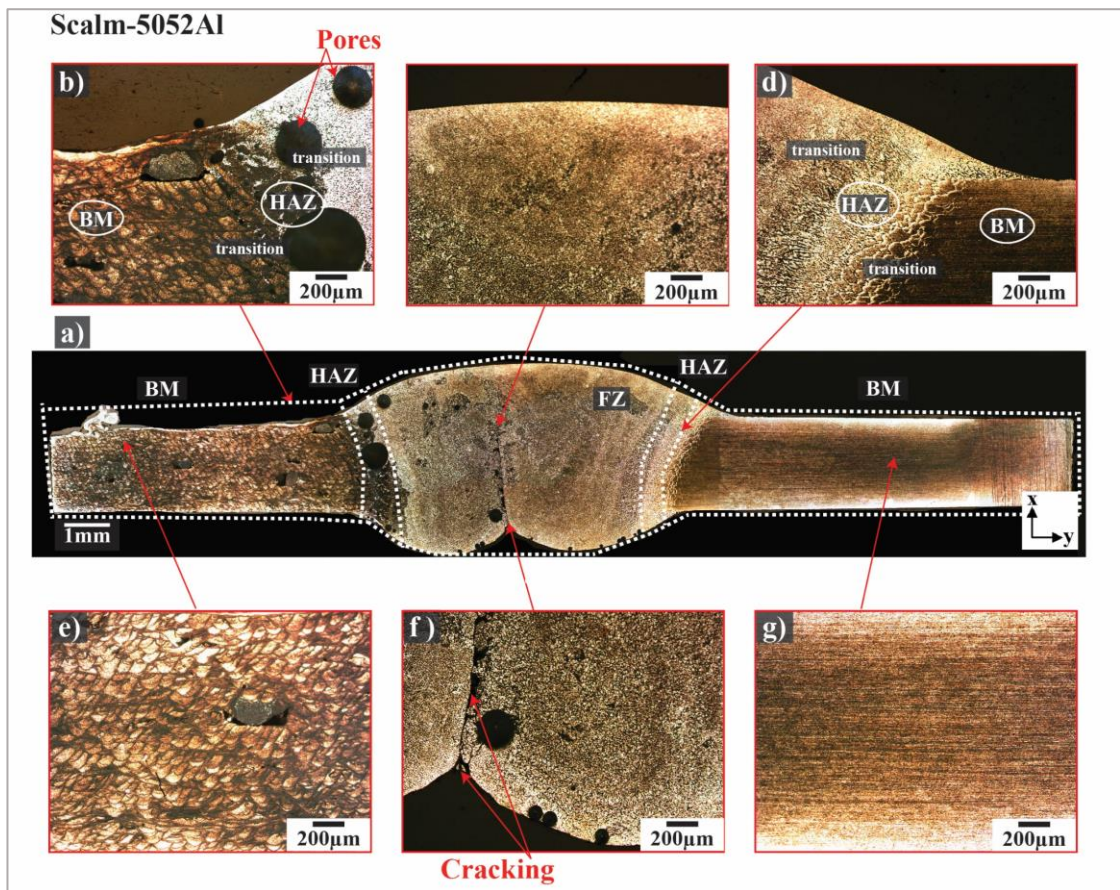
Optical micrographs of Scalmalloy to 5052Al welded microstructure in the perpendicular to the weld direction – heat affected zone (HAZ), base metal (BM) and fusion zone (FZ)
